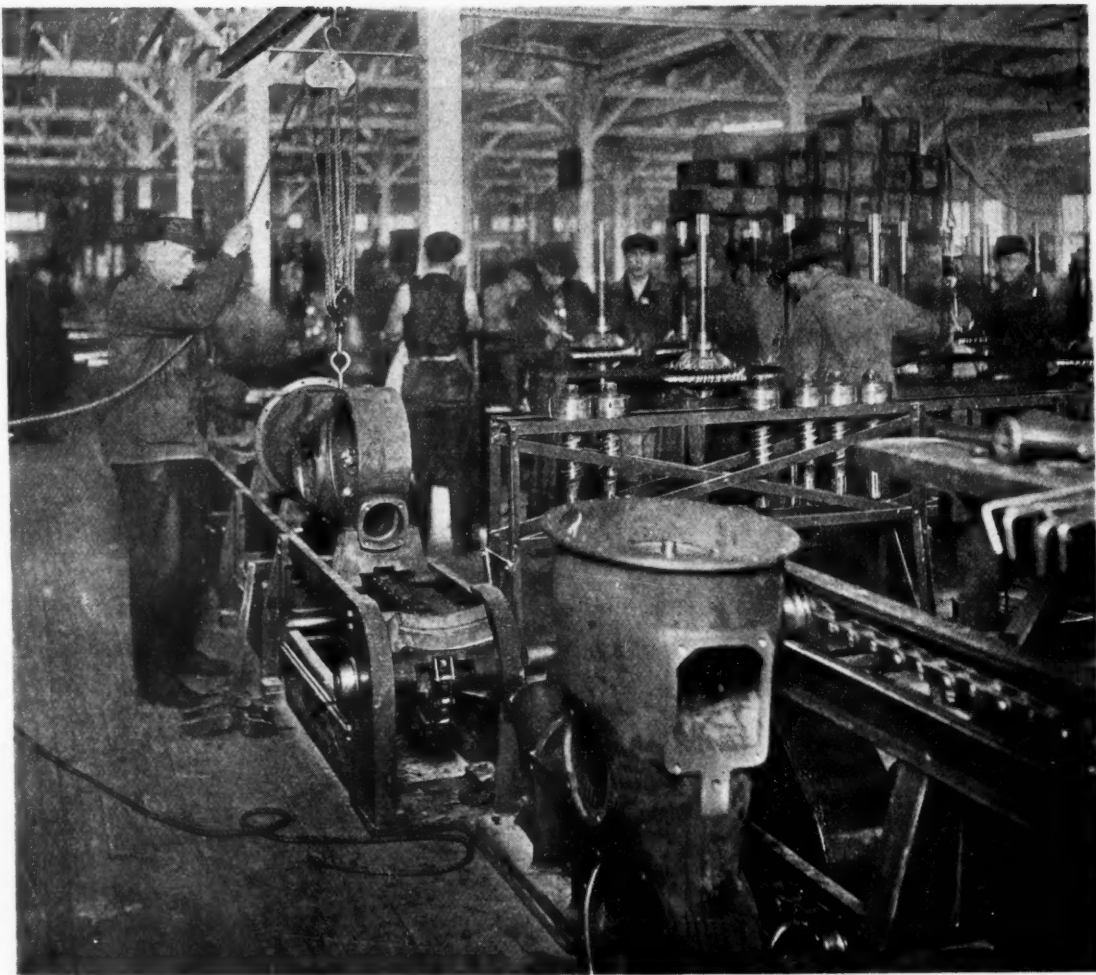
When the first assembly operations are complete, with the transmission housing in a vertical position, they turn over horizontally to the next section of the transmission assembly chain. This view shows the housing just about ready to turn over, and one is turned over in the background. Also in the background can be seen the preliminary sub-assemblies on the worm shaft and rear axle
